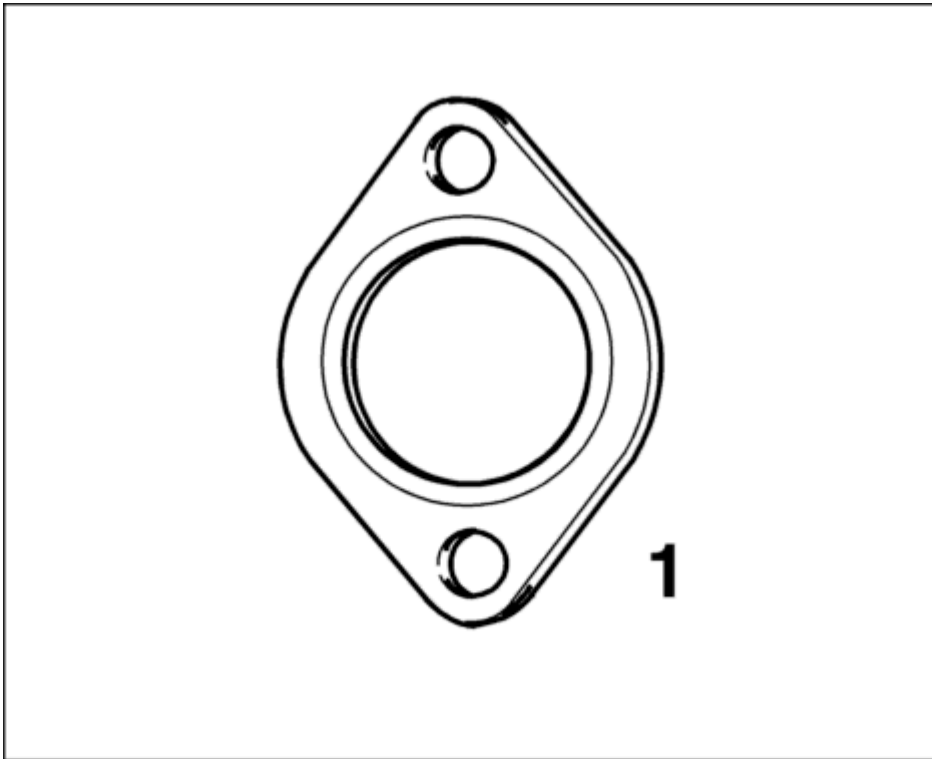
Installation position for solenoid hydraulic valve retainer plates
